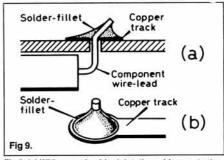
(a) With a good solder joint, the solder meets the metal surfaces at a low angle. (b) The solder forms a smooth fillet all round.
